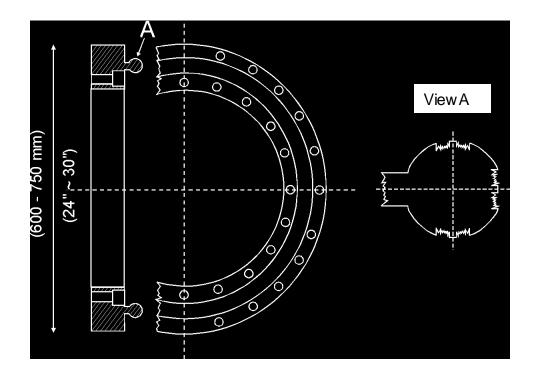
Manufacturing setup of the NIST standard bullets on the NC diamond turning machine
